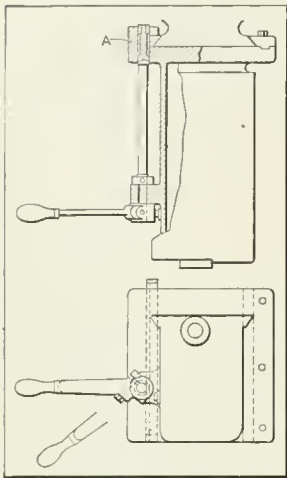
Long Strip for Clamping Knee of Milling Machine
